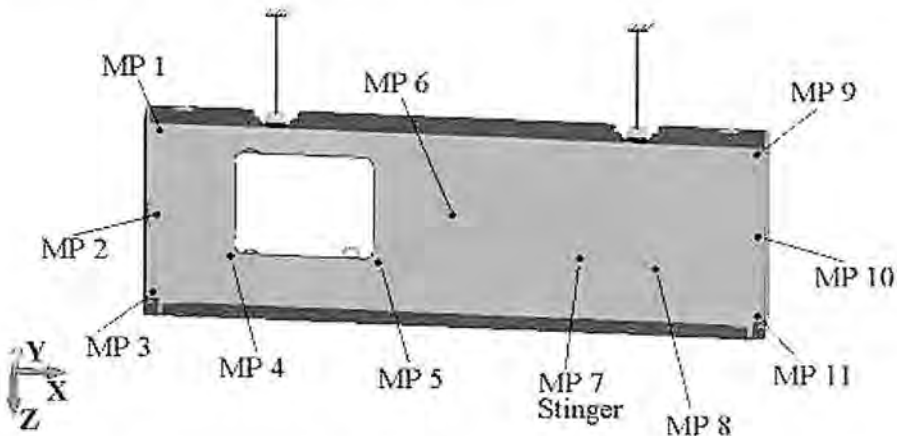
Measurement points, stinger and suspension positions pointed out on the Lower front plate.
